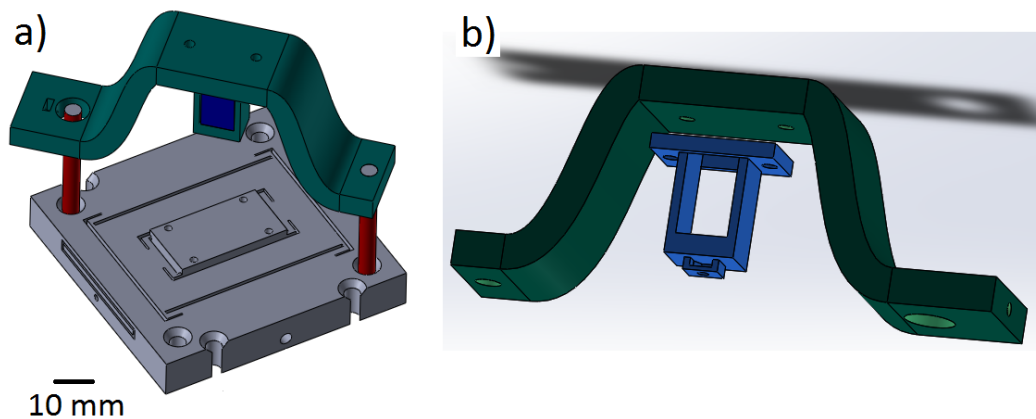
a) Height control piece mounted on the scanner, with dark blue piezoelectric actuator inside the attached cage. b) Height control piece and cage hovering separated.
